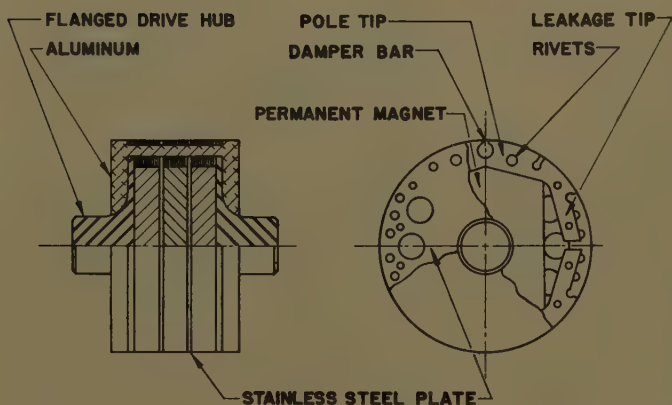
(above, left). Eight-pole rotor, sectioned to show parts of typical cage structure with hollow shaft
